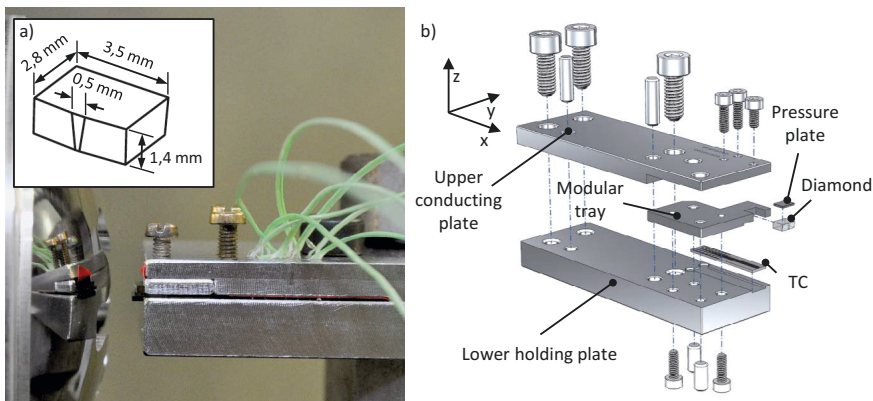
(a) Experimental setup and the diamond insert; (b) exploded view of the modular holding system.
